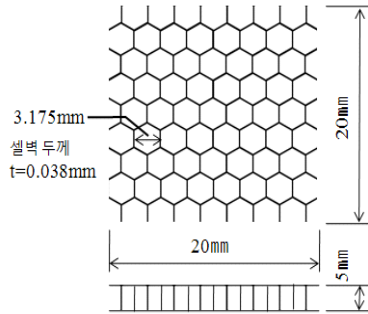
Aluminum honeycomb core specimen for thickness-wise compressive test.
